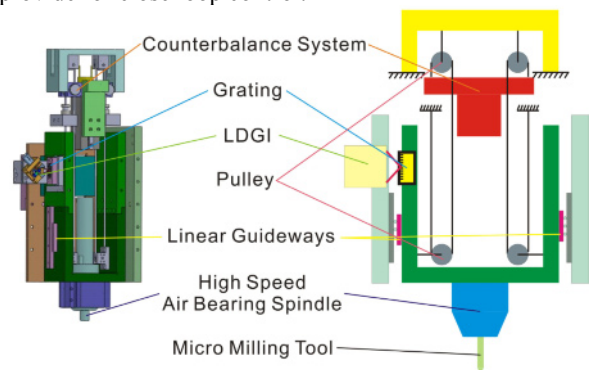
The high speed air bearing spindle clamp and driving mechanism in Z-axis
